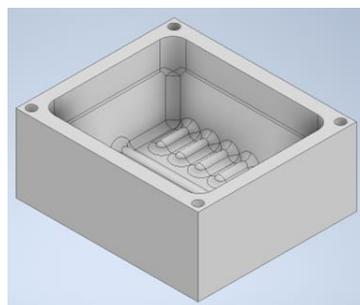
Aluminium Moulds - 0046-DE-CAD-004 - 120X100X50 TRAY BASE
